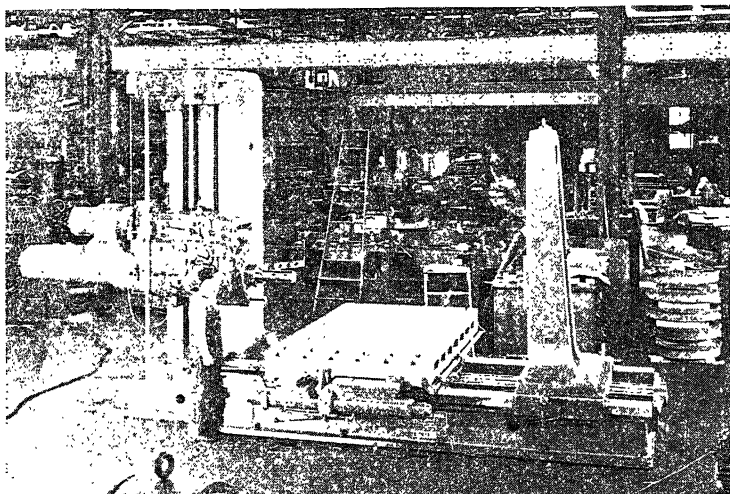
A horizontal boring mill. (Courtesy of William Sellers and Company.)
